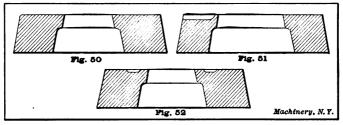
Section of Trimming Die to show the Clearance given to the Cutting Edge. Fig. 51. Section of Cold-trimmer to show Method of Cutting away a Space at the Front to clear Rough Byrues. Fig. 52. Section of Trimming Die to show Channel Cut around the Die-opening to accomodate Forgings that must be trimmed wrong-side up
